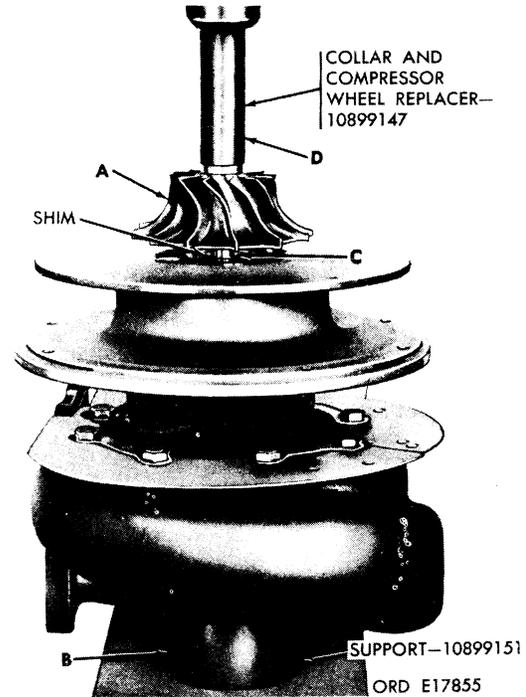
PRESSING COMPRESSOR WHEEL ON SHAFT AND TURBINE WHEEL.
